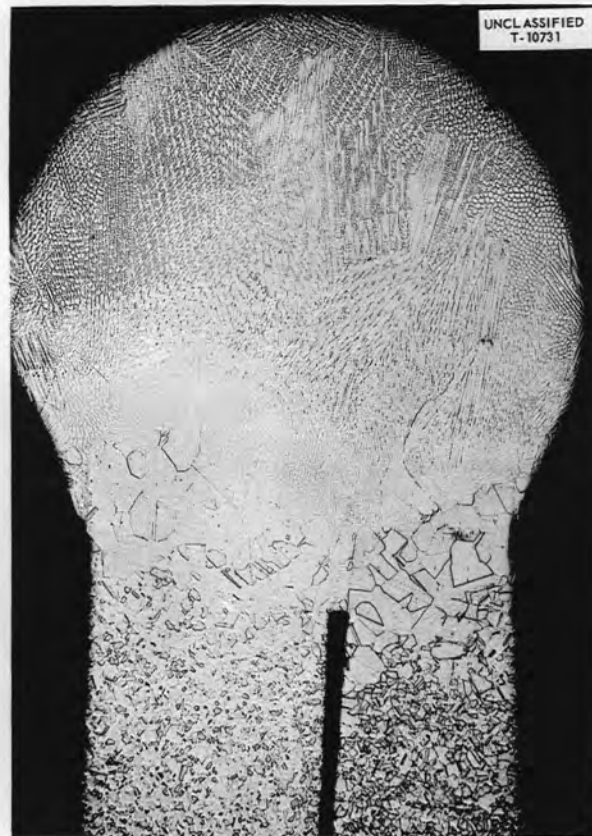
Cross Section of Heliarc-Welded Inconel-Coated Thermocouple Junction of No. 20 AWG Chromel and Alumel Wires. Wires carefully cleaned before welding. Note absence of chromium oxide deposits.
